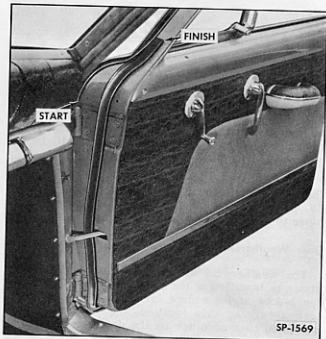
Weatherseal Installation on Front Door Hinge Pillar
